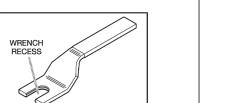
W-TYPE 9 SPRINKLER WRENCH
